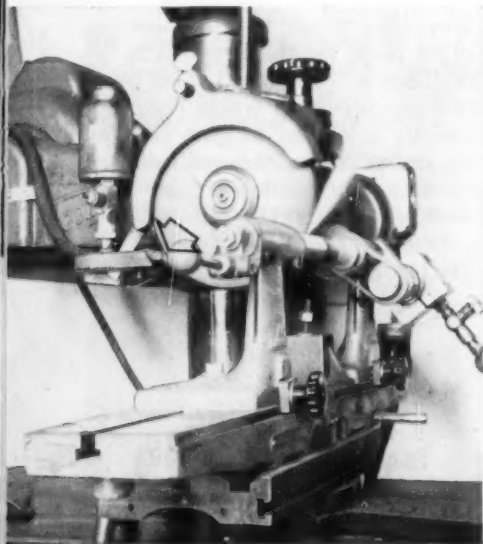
Synthetic cutting oil solution extends grinding wheel life. Note felt strip (arrow) which feeds solution to wheel.
